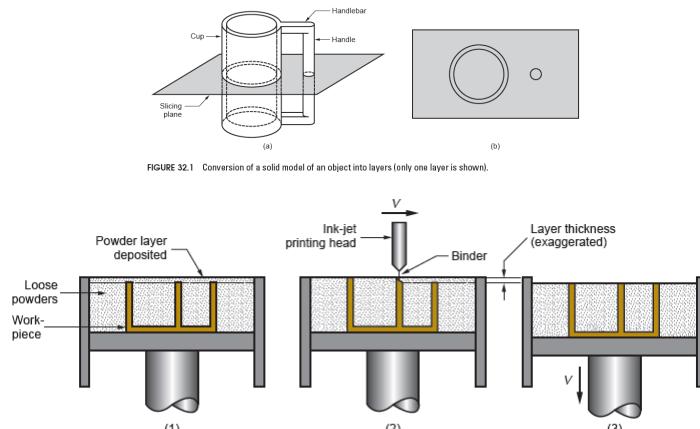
Three-dimensional printing: (1) powder layer is deposited, (2) ink-jet printing of areas that will become the part, and (3) piston is lowered for next layer (key: v = motion).
